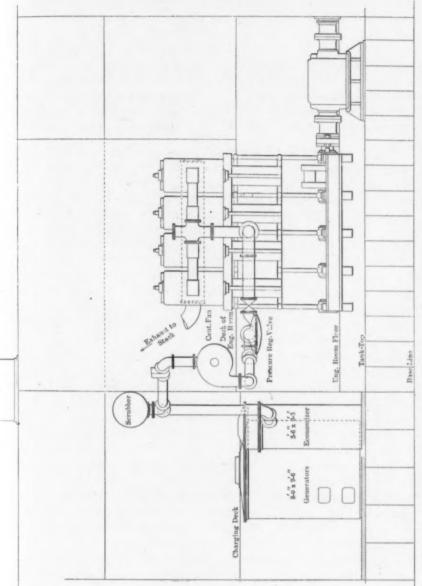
Plan and Elevation of Proposed Two-Generator Marine Producer Plant; 1000 H.P.
